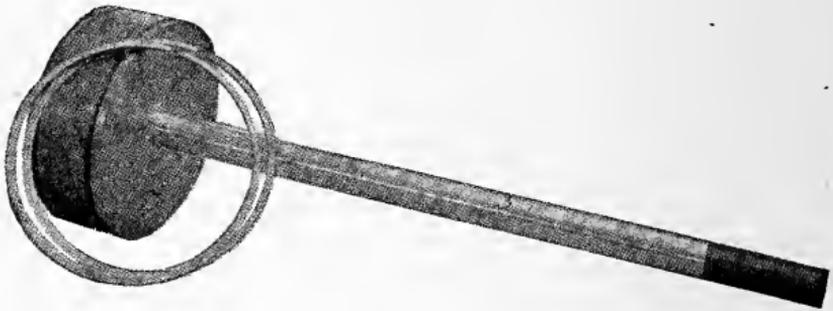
Piston, Showing Piston Rings for Making Steam-Tight Joints
